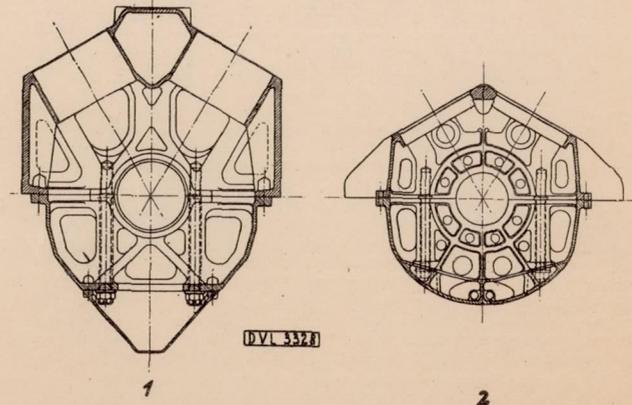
Crankcase cross sections of 12-cylinder in-line engines II.
